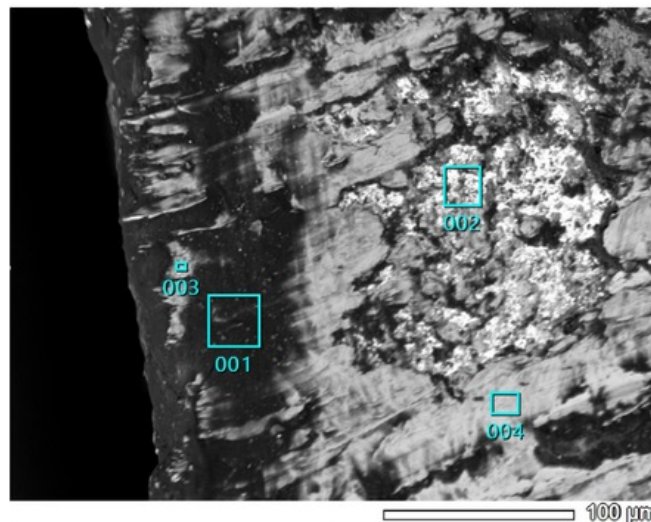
DNMG cutting tool after Optimal machining 3D printed Ti-64.
